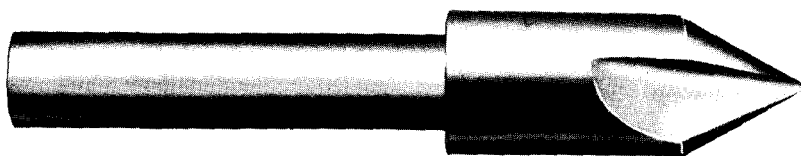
or, more commonly, using a countersink and drill which combines both tools (fig. 69).
